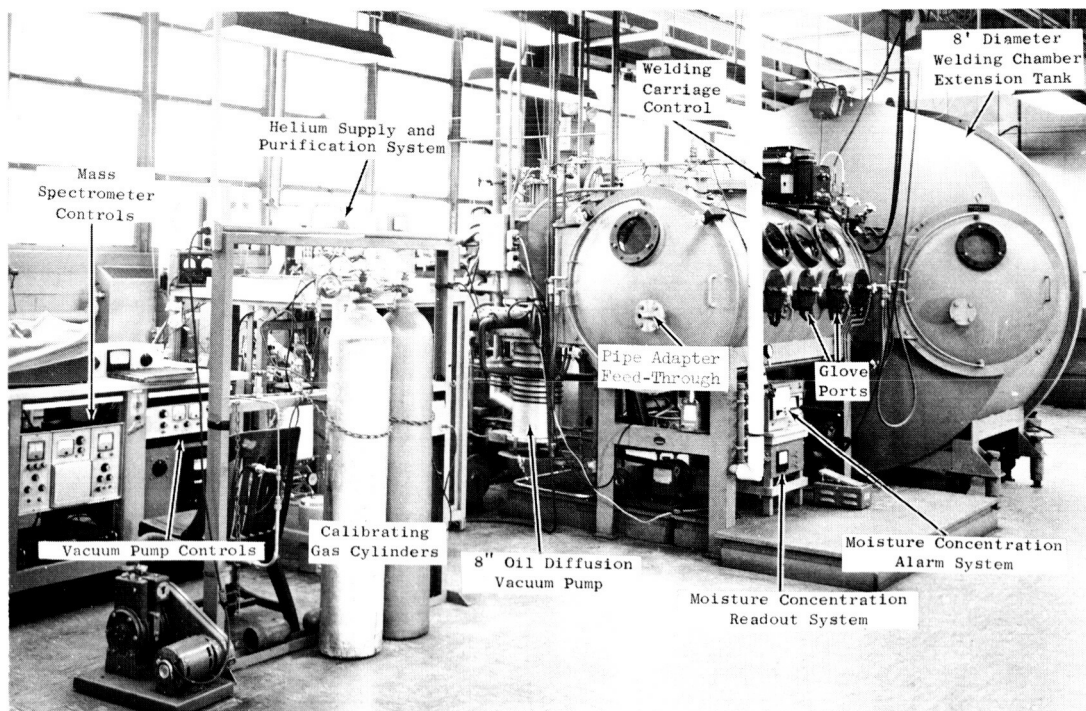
Vacuum-purge inert gas welding chamber and helium purity control system with welding chamber extension tank attached to 3-foot-diameter by 6-foot-long welding chamber.
